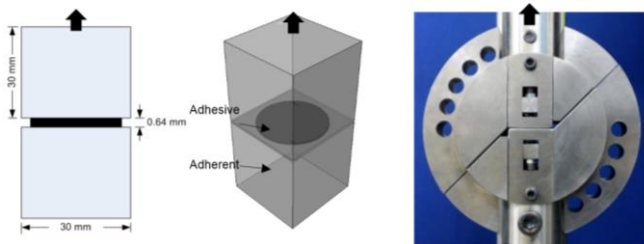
Adhesively bonded specimen geometry and modified Arcan jig setup for tension test of the PSA specimen.
